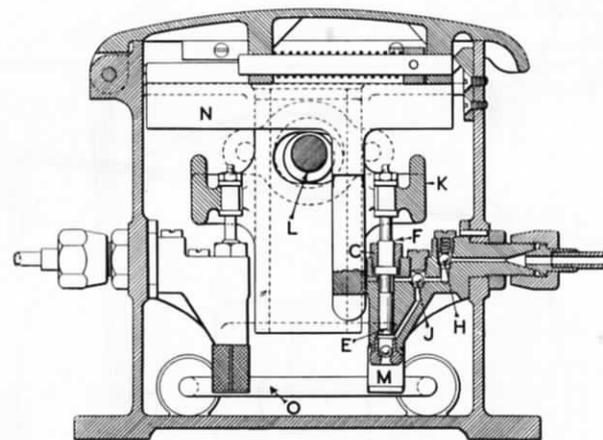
SILVERTOWN MECHANICAL LUBRICATOR IN CROSS-SECTION.
